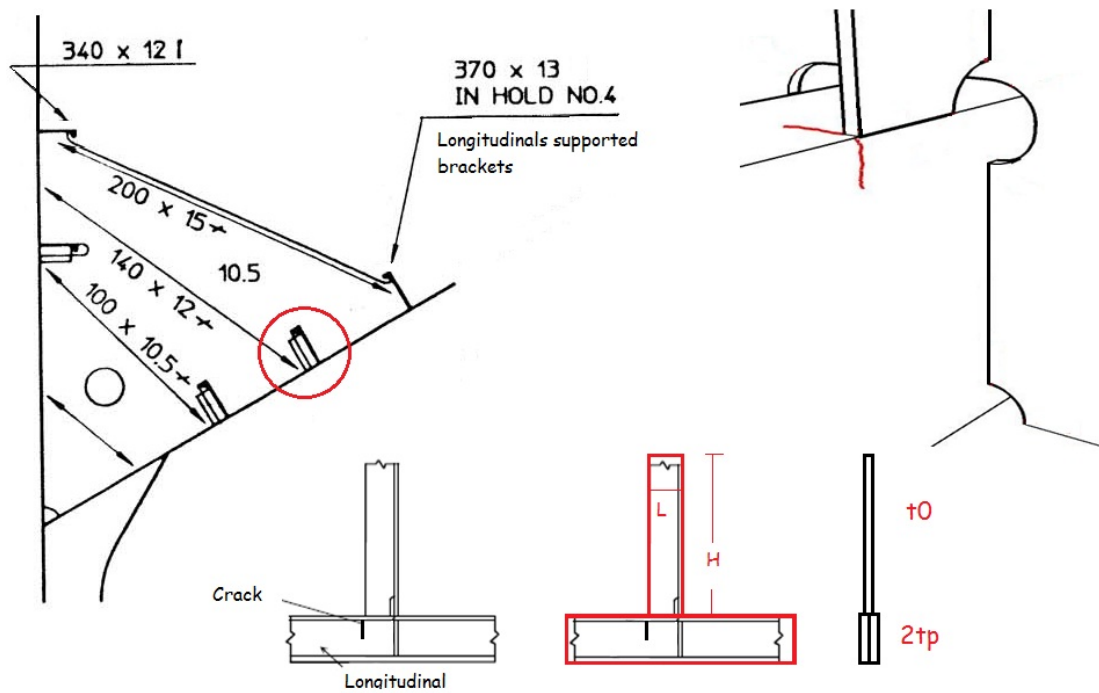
Situation I of Cracks happen at the connection of the flange and web plate in lowest longitudinal and vertical stiffener (axial loading),
